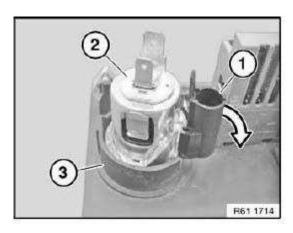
Identifying Power Socket And Bulb Holder Courtesy of BMW OF NORTH AMERICA, INC.
